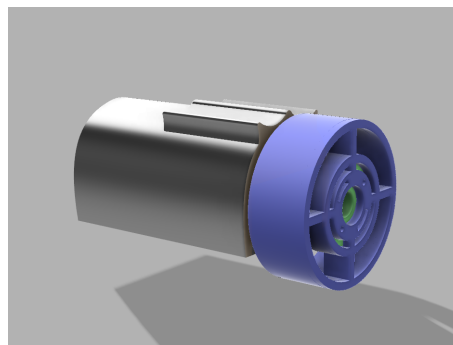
Version 3 of the casing, an improved design of version 2. More efficient usage of the space by removing unnecessary parts.
